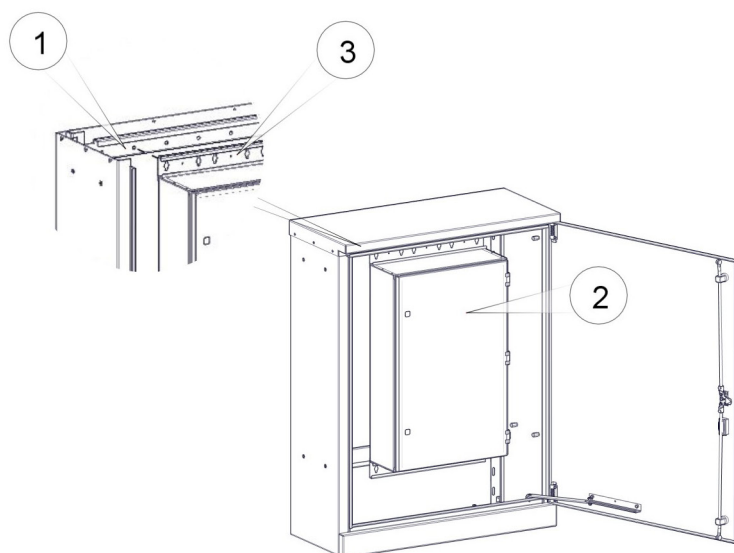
Fastening lifting lugs on the cable distribution cabinet.
